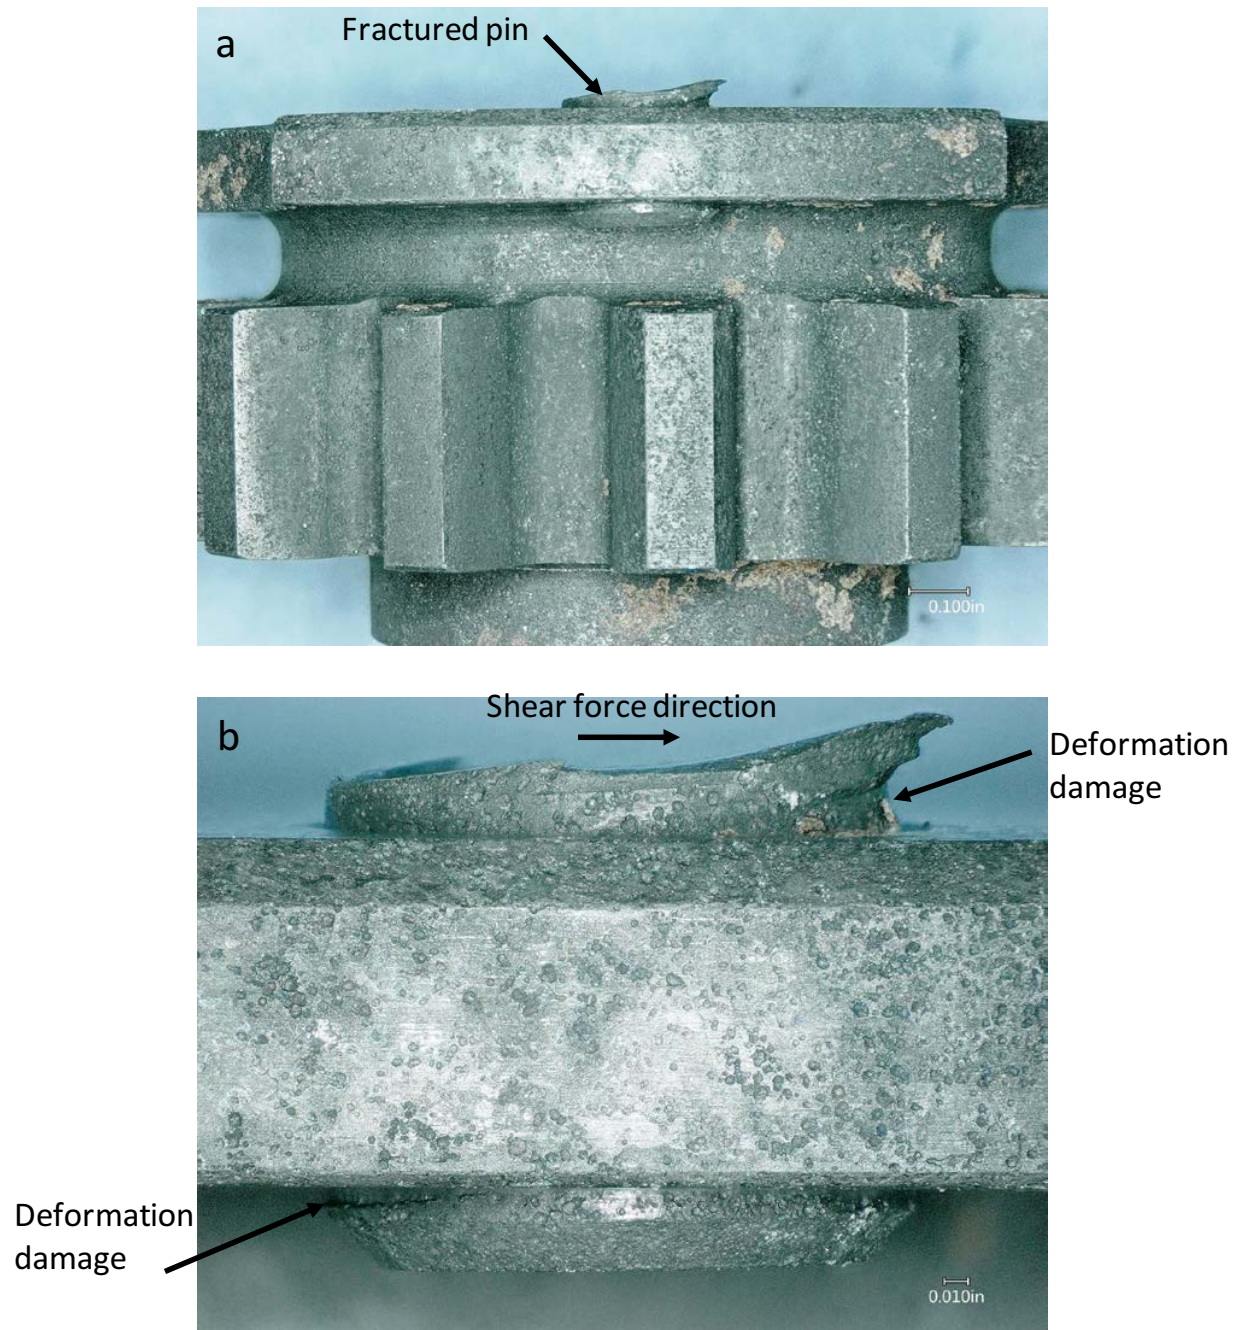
Close digital-microscope profile-views of the fracture surface of the dowel pin. The surfaces have been cleaned with Evaporust and fine pits are evident. Key fracture features are identified.
